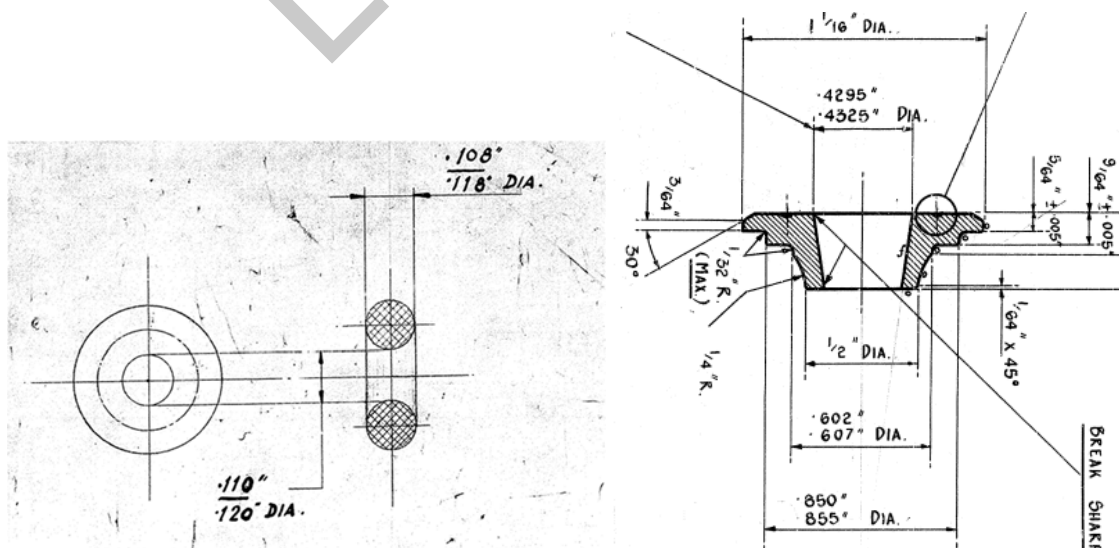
Packing ring 2A879 and stem cup AEA402.
